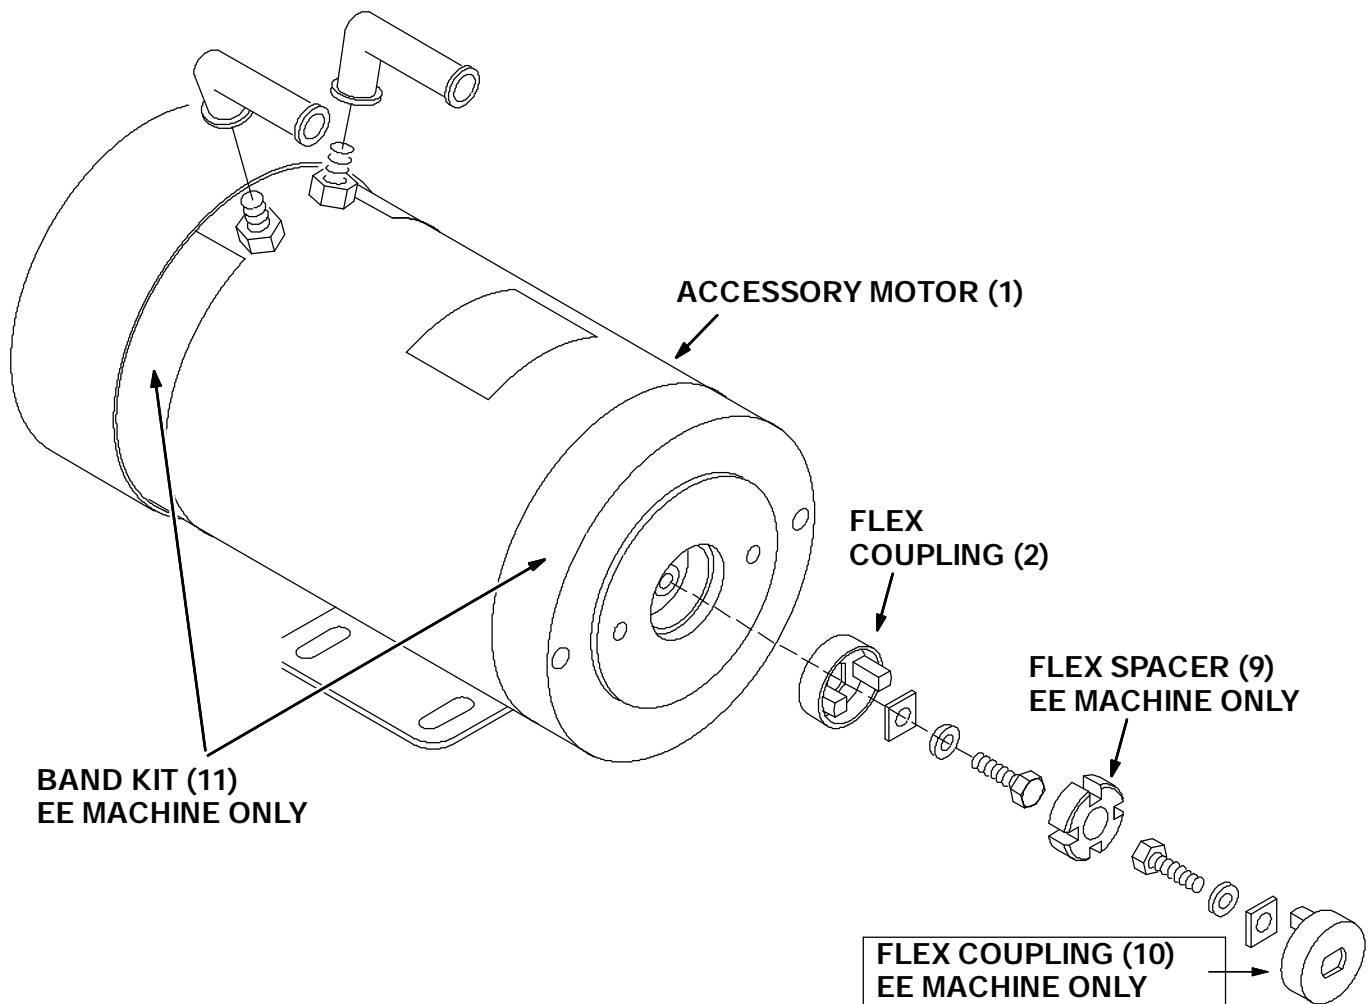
EE MACHINE COUPLING ASSEMBLY
